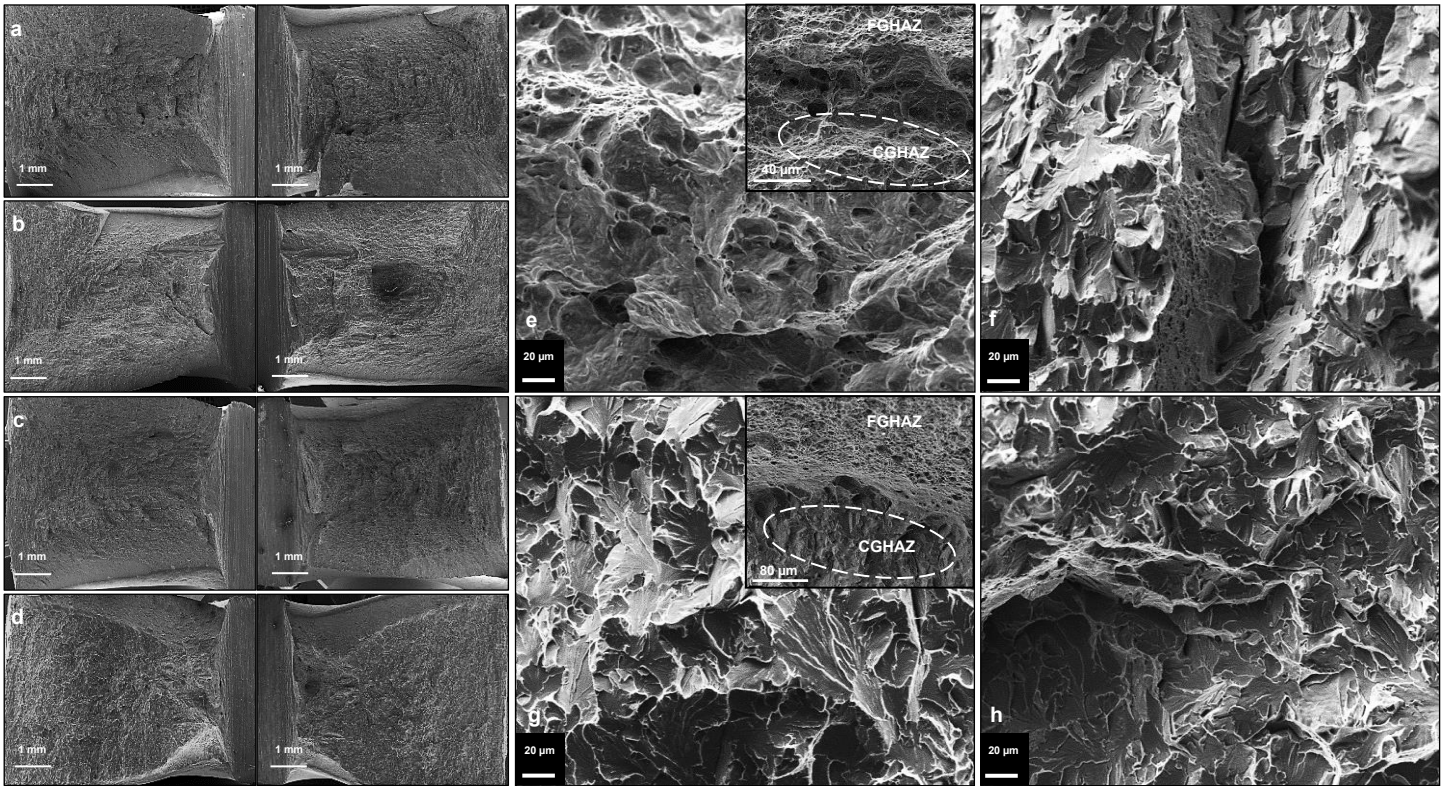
SEM SE fractographs of specimens welded by (a,b) CWTSAW and (c,d) TSAW processes. Micrographs showing the fracture surfaces in the CGHAZ of specimens welded by (e,f) CWTSAW and (g,h) TSAW. The insets in (e) and (g) show the boundary between FGHAZ and CGHAZ in the weld specimens. Micrographs (a,c,e,g) and (b,d,f,h) are at RT and -30°C , respectively.
